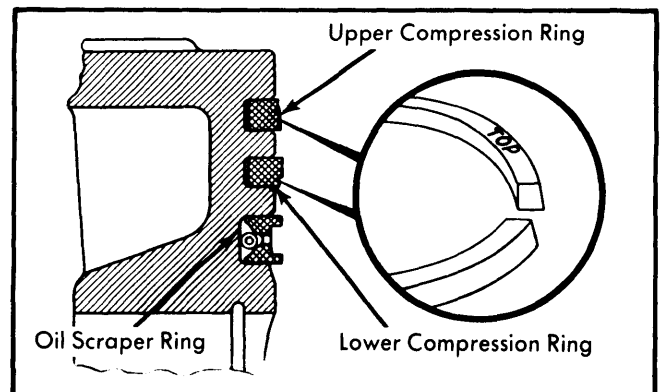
Piston Ring Installation — Word TOP Must Face Piston Crown
